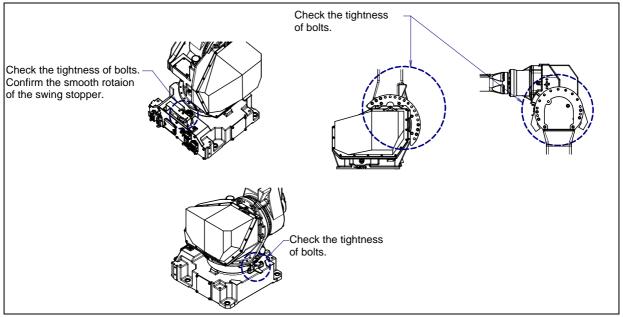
Check of fixed mechanical stopper and adjustable mechanical stopper
